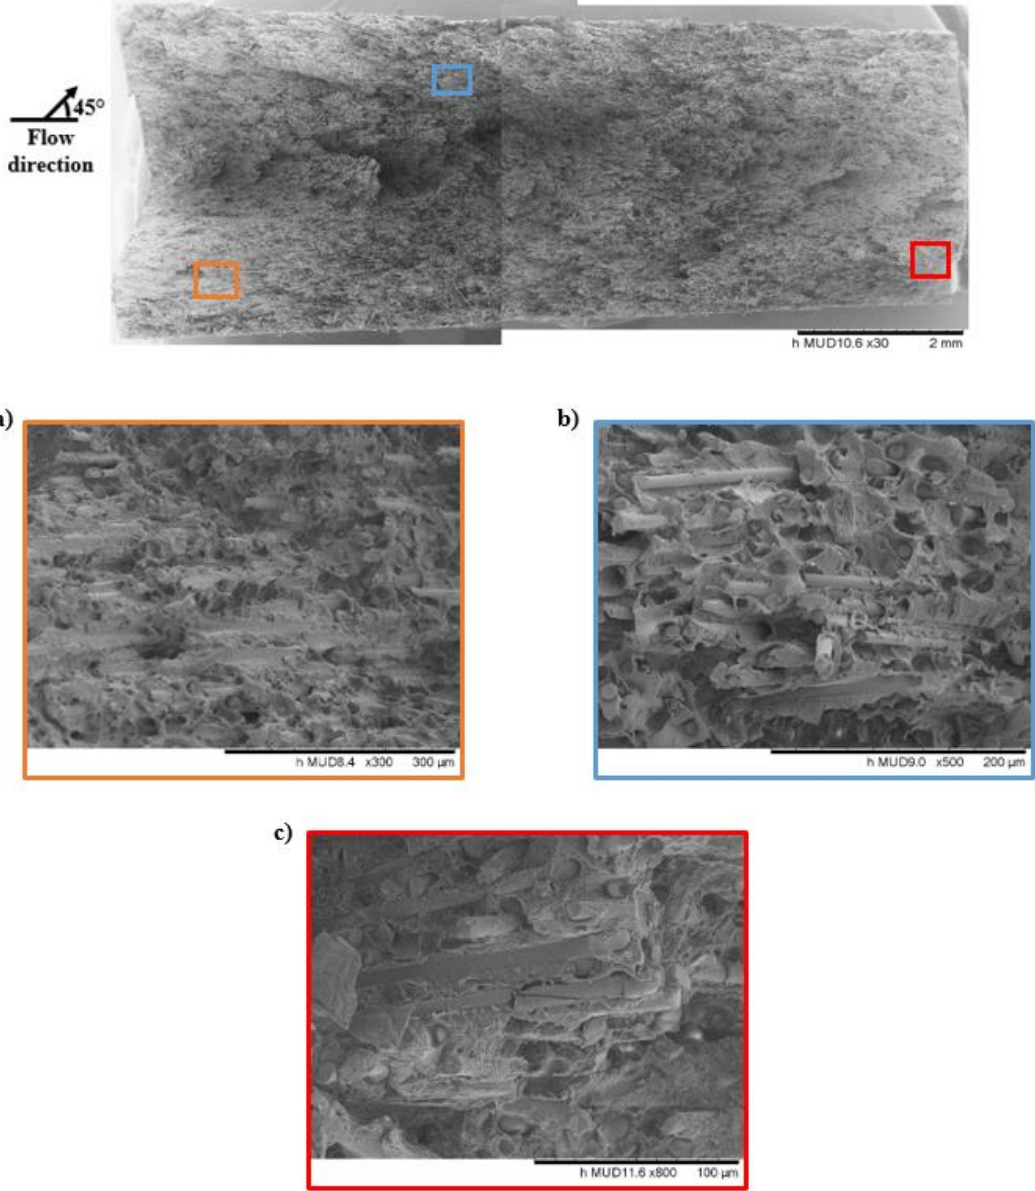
Fracture surface of a fatigue 45° specimen at room temperature
